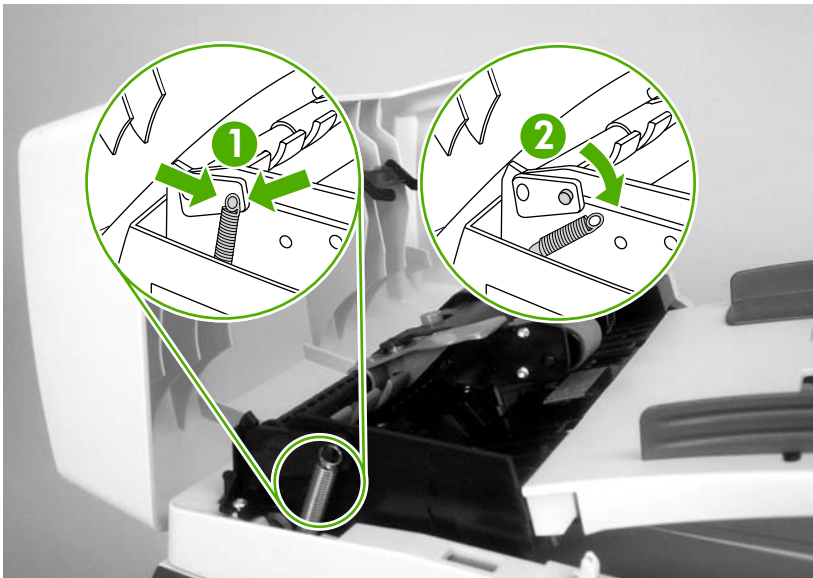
Replacing the ADF pickup-roller assembly (2 of 6)
